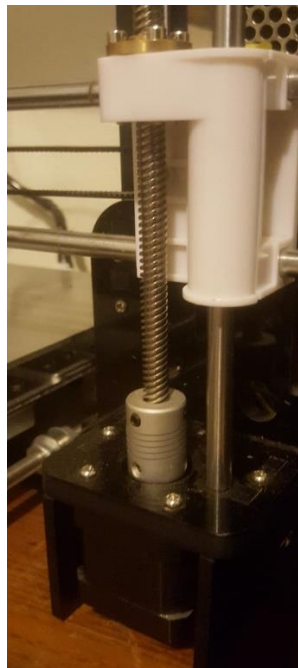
Z Axis Motor for Prusa i3 3D Printer
